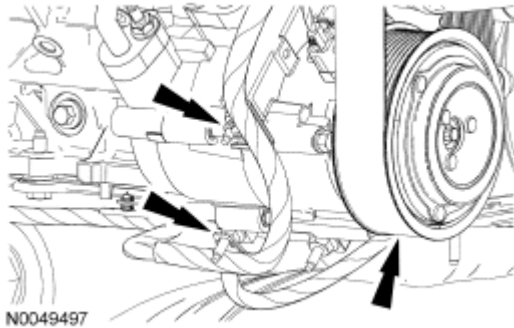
Identifying SC Drive Belt, A/C Compressor, Wiring Harness Retainers & A/C Compressor Stud Bolts
